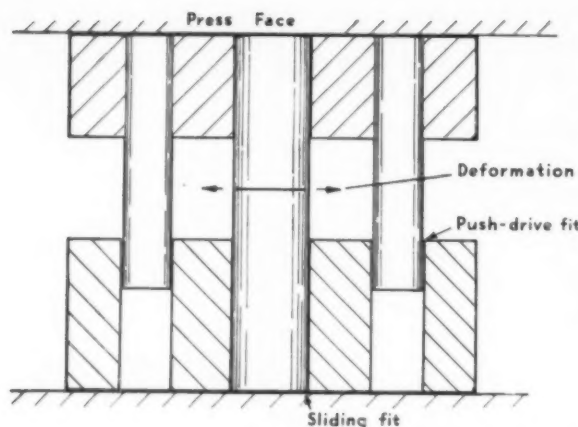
Jig for cold welding cylindrical rod specimens.
